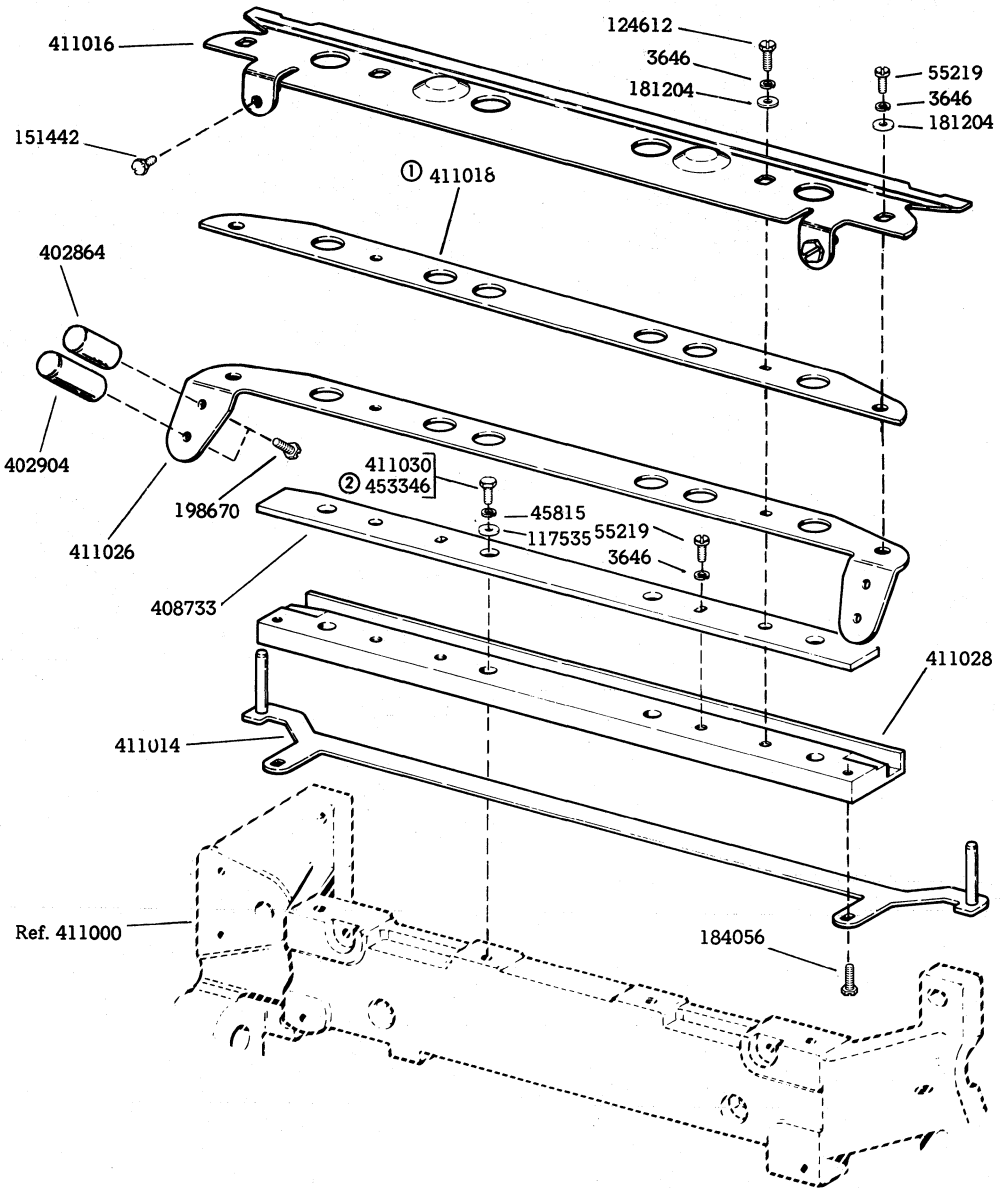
Front Casting Assembly (Forms Access - Tractor Feed)
